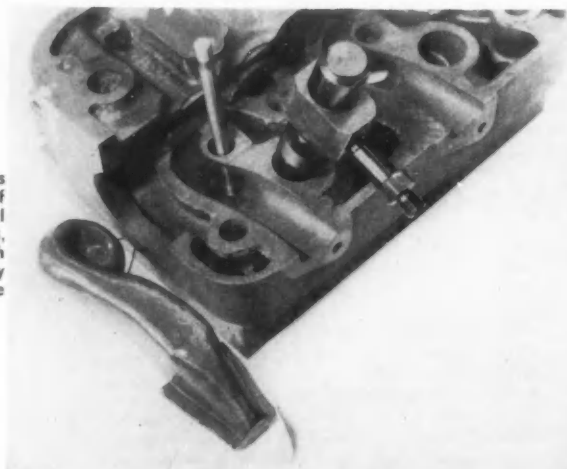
M.A.N. engines now have, instead of shrouded valves, swirl producing intake ports, as shown above, which provide the necessary swirl at lower pressure losses.
